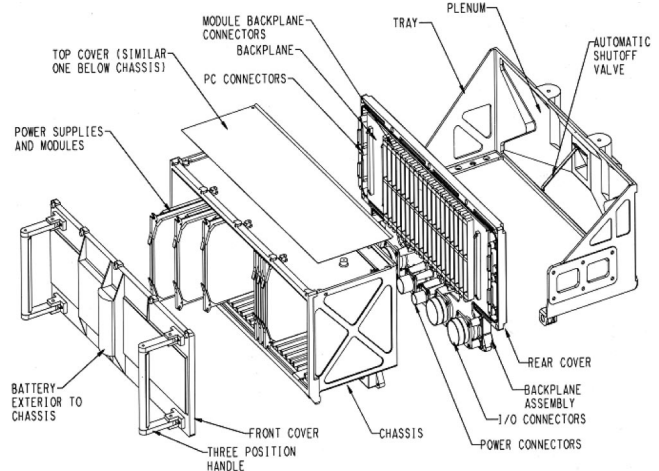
Exploded view of air-cooled computer chassis showing inlet air plenum, PWB card guides, and pin fin coldwalls
